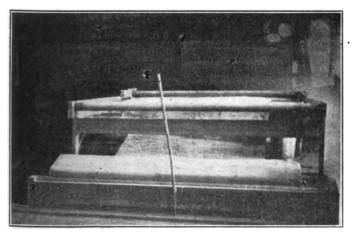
Detail of the Knife, Showing the Manner of Attaching it the Machine
